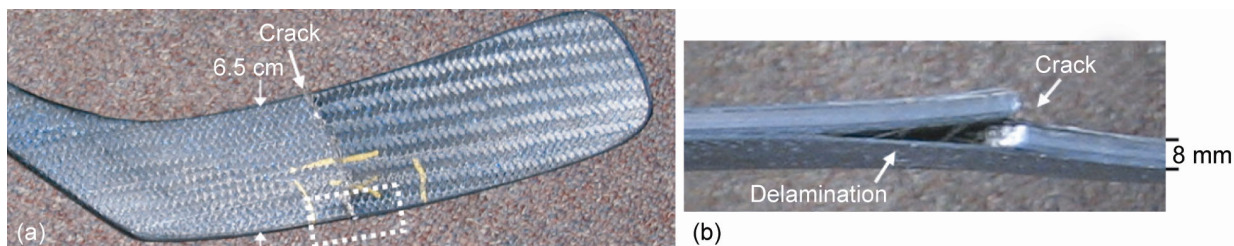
Photographs of the hockey blade with a crack through the thickness of the foam and one of the face sheets: (a) an overall image of the hockey blade illustrating the location of the crack and (b) a side view from the bottom of the blade depicting the morphology of damage near the crack.
